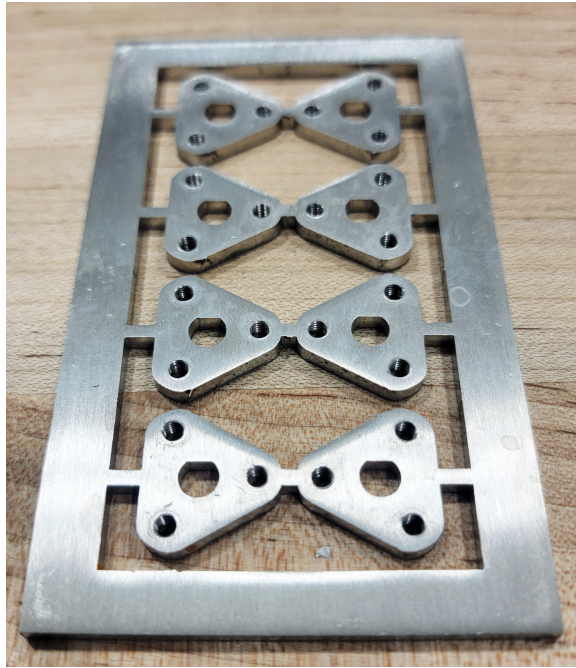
Laser cut and tapped sprued stainless steel rotor bodies Note the half-moon driveshaft hole. Laser cutting and tapping operations are performed with multiple sprued parts for ease of handling, then cut out using a rotary tool.
